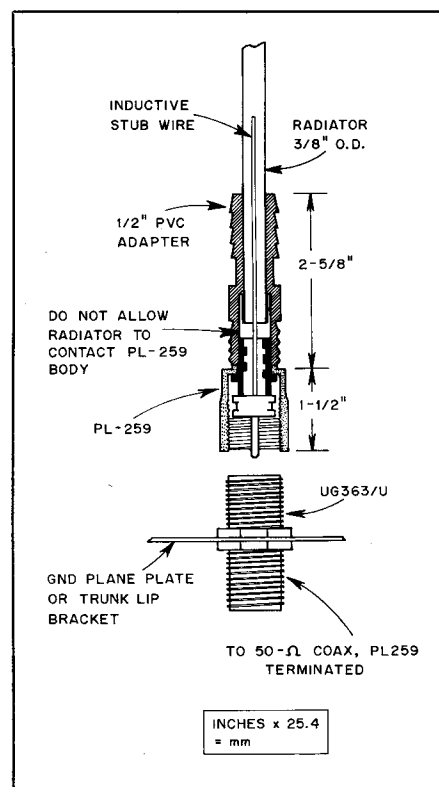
This drawing shows a cutaway view of the antenna assembly. A PVC pipe adapter allows simple and inexpensive construction.
